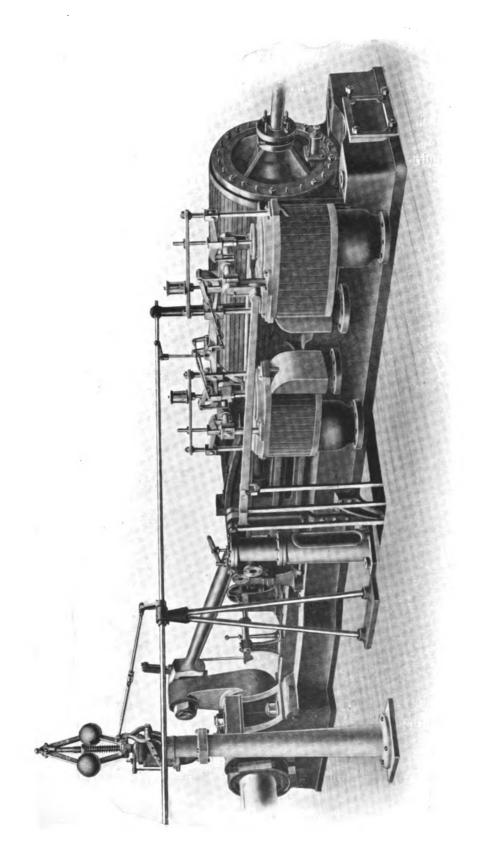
HYLTON WINDING ENGINES-VALVE GEAR.
